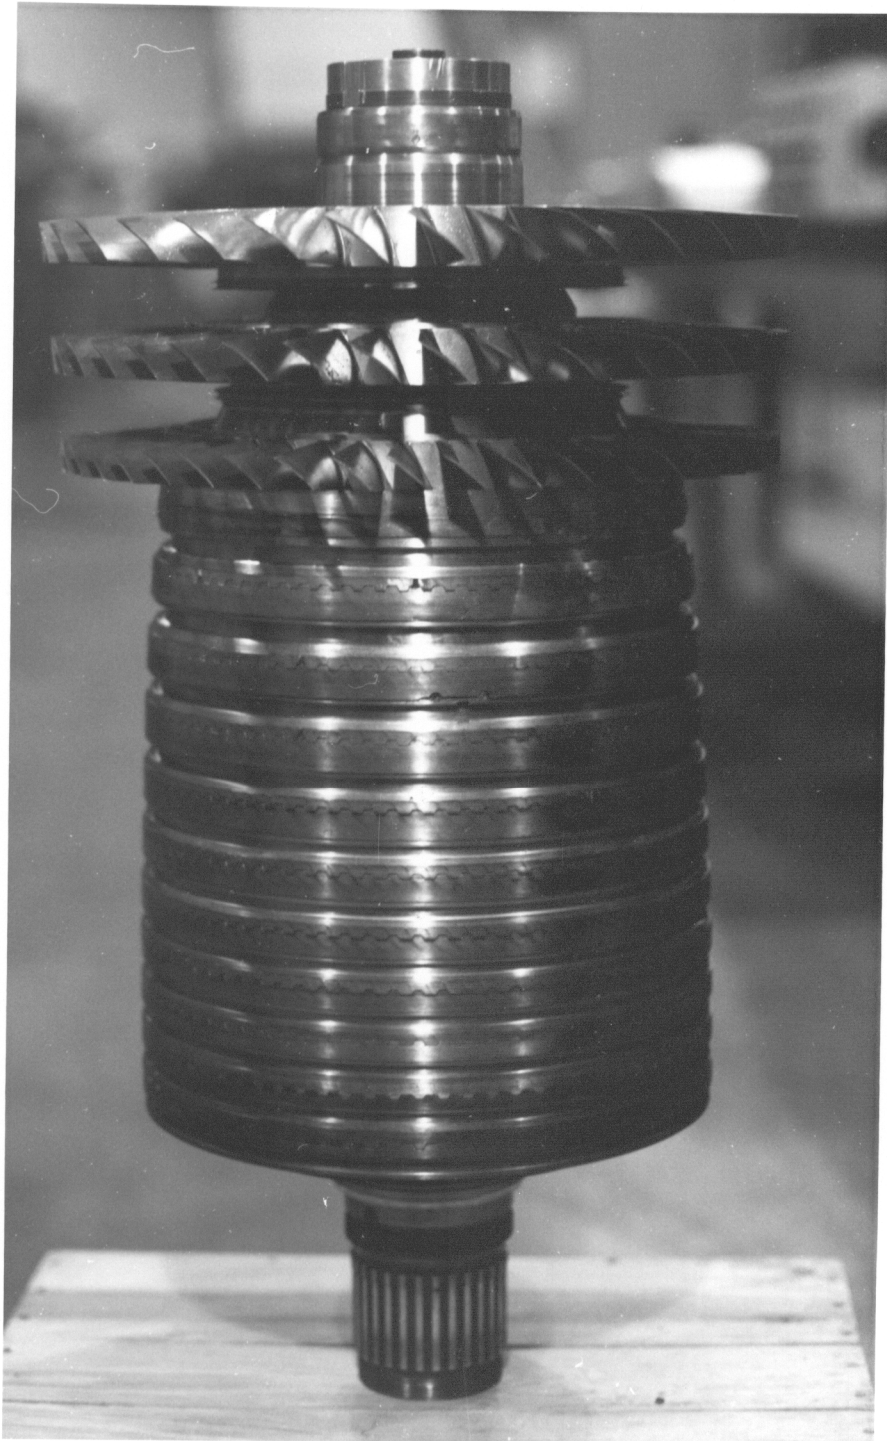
PHOTOGRAPH OF THREE-STAGE TEST ROTOR
